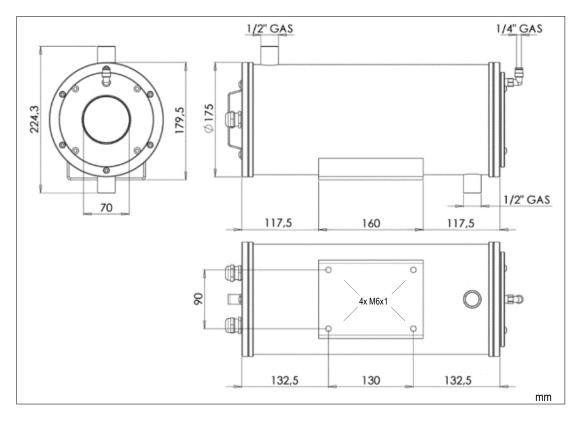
Dimensions of the Protective Enclosure (A-TV-WC)
